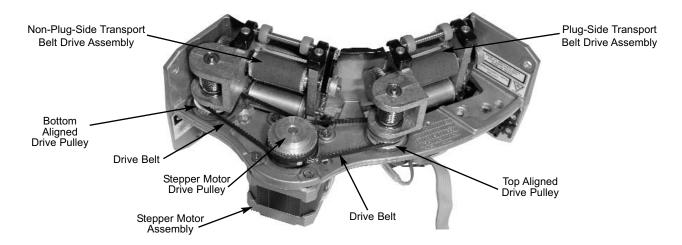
Removed ScanX Duo Transport Arch Assembly (Bottom View)
